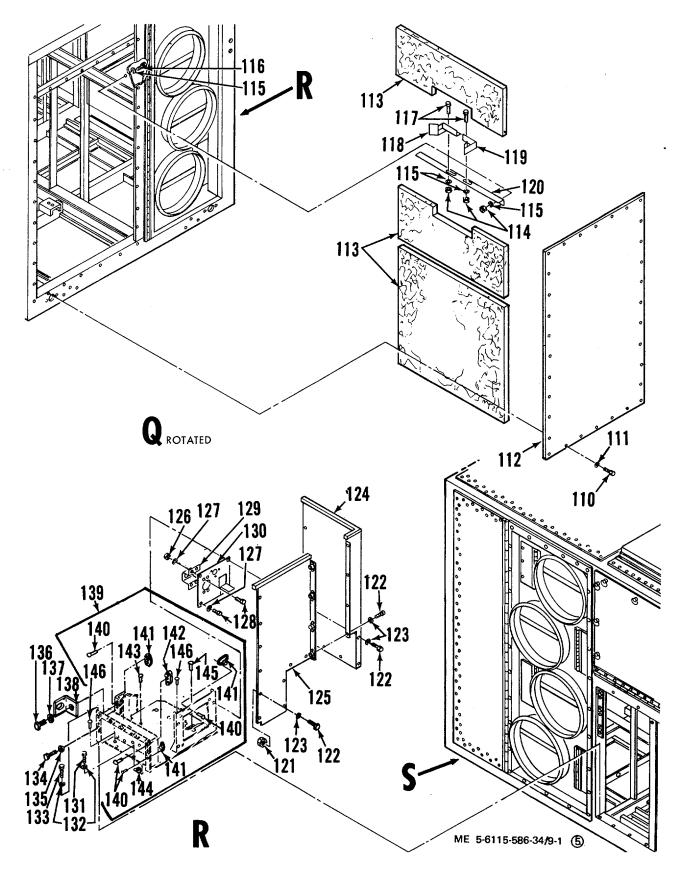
Enclosure assembly, exploded view. (sheet 5 of 10)
